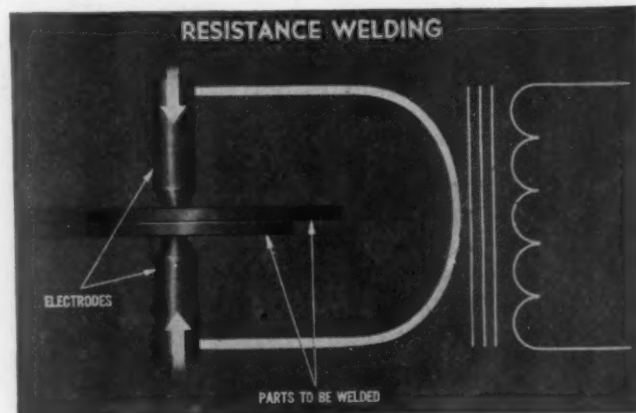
The electrodes for resistance welding transmit current and apply pressure
